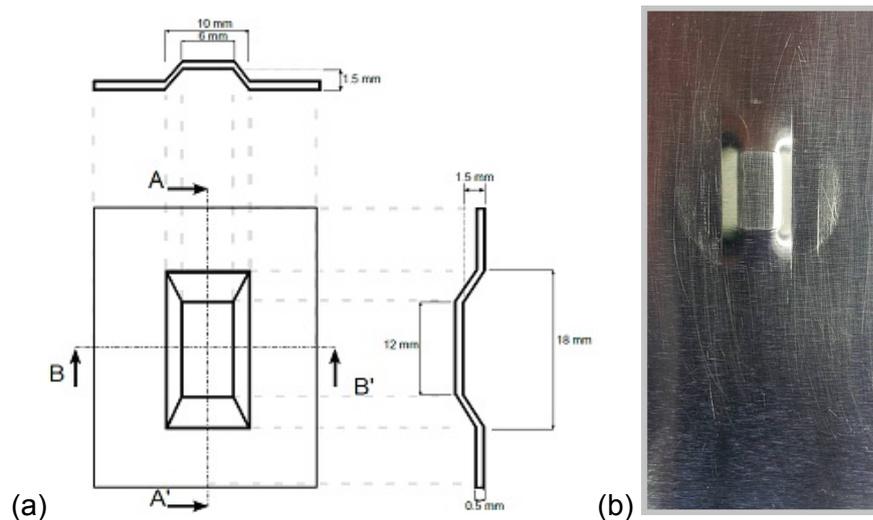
(a) Hump configuration, (b) Intended spot welding location – “hump” in the AA1199 aluminum sheet.
